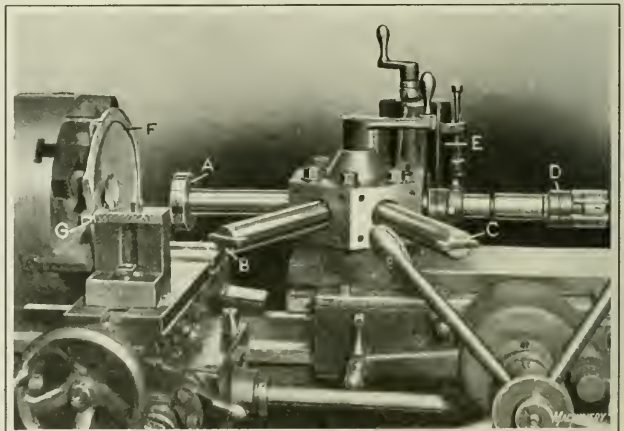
Tool Equipment of a Turret Lathe used for boring, reaming, and facing Rear Crankcase Covers
